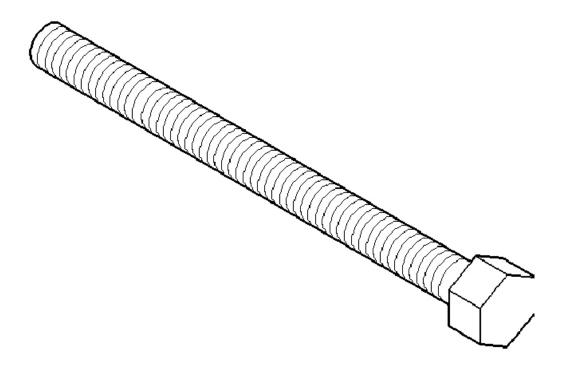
Crankshaft Damper Installer Bolt C-4685-C1 Courtesy of CHRYSLER LLC
